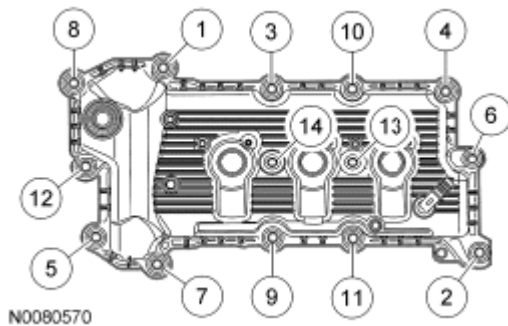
Identifying Valve Cover & Bolts In Tightening Sequence
